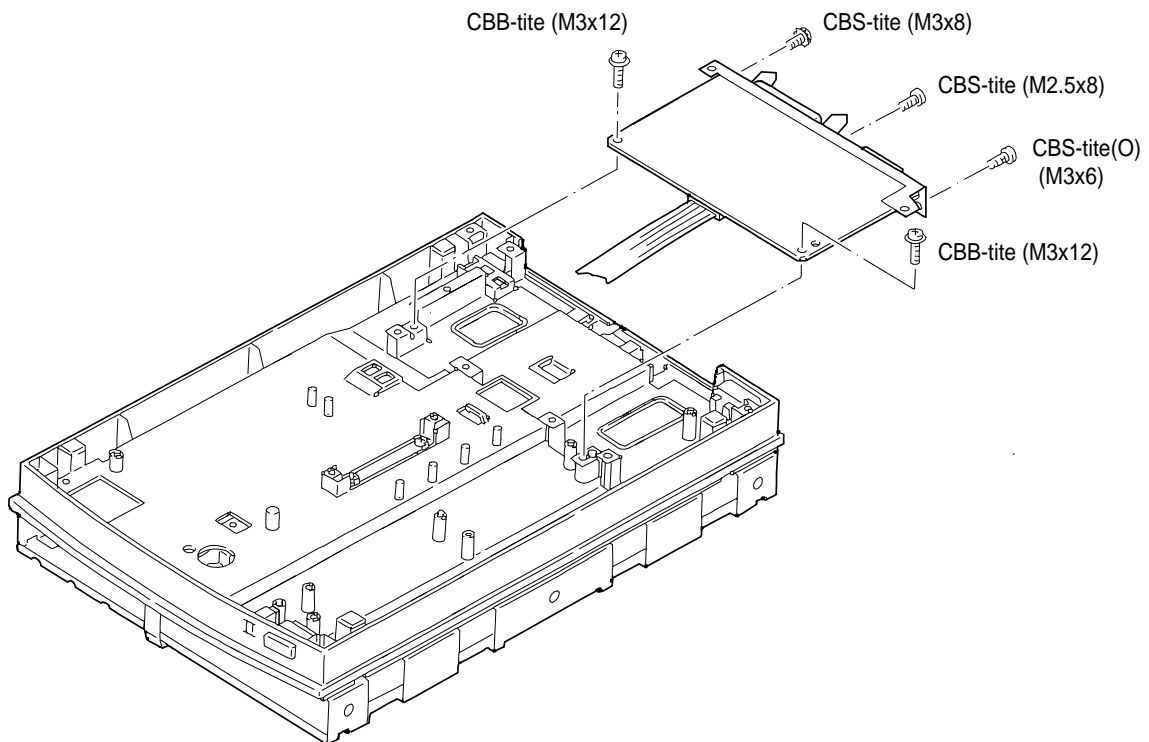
Removing the B034 MAIN/MAIN-B Boards
